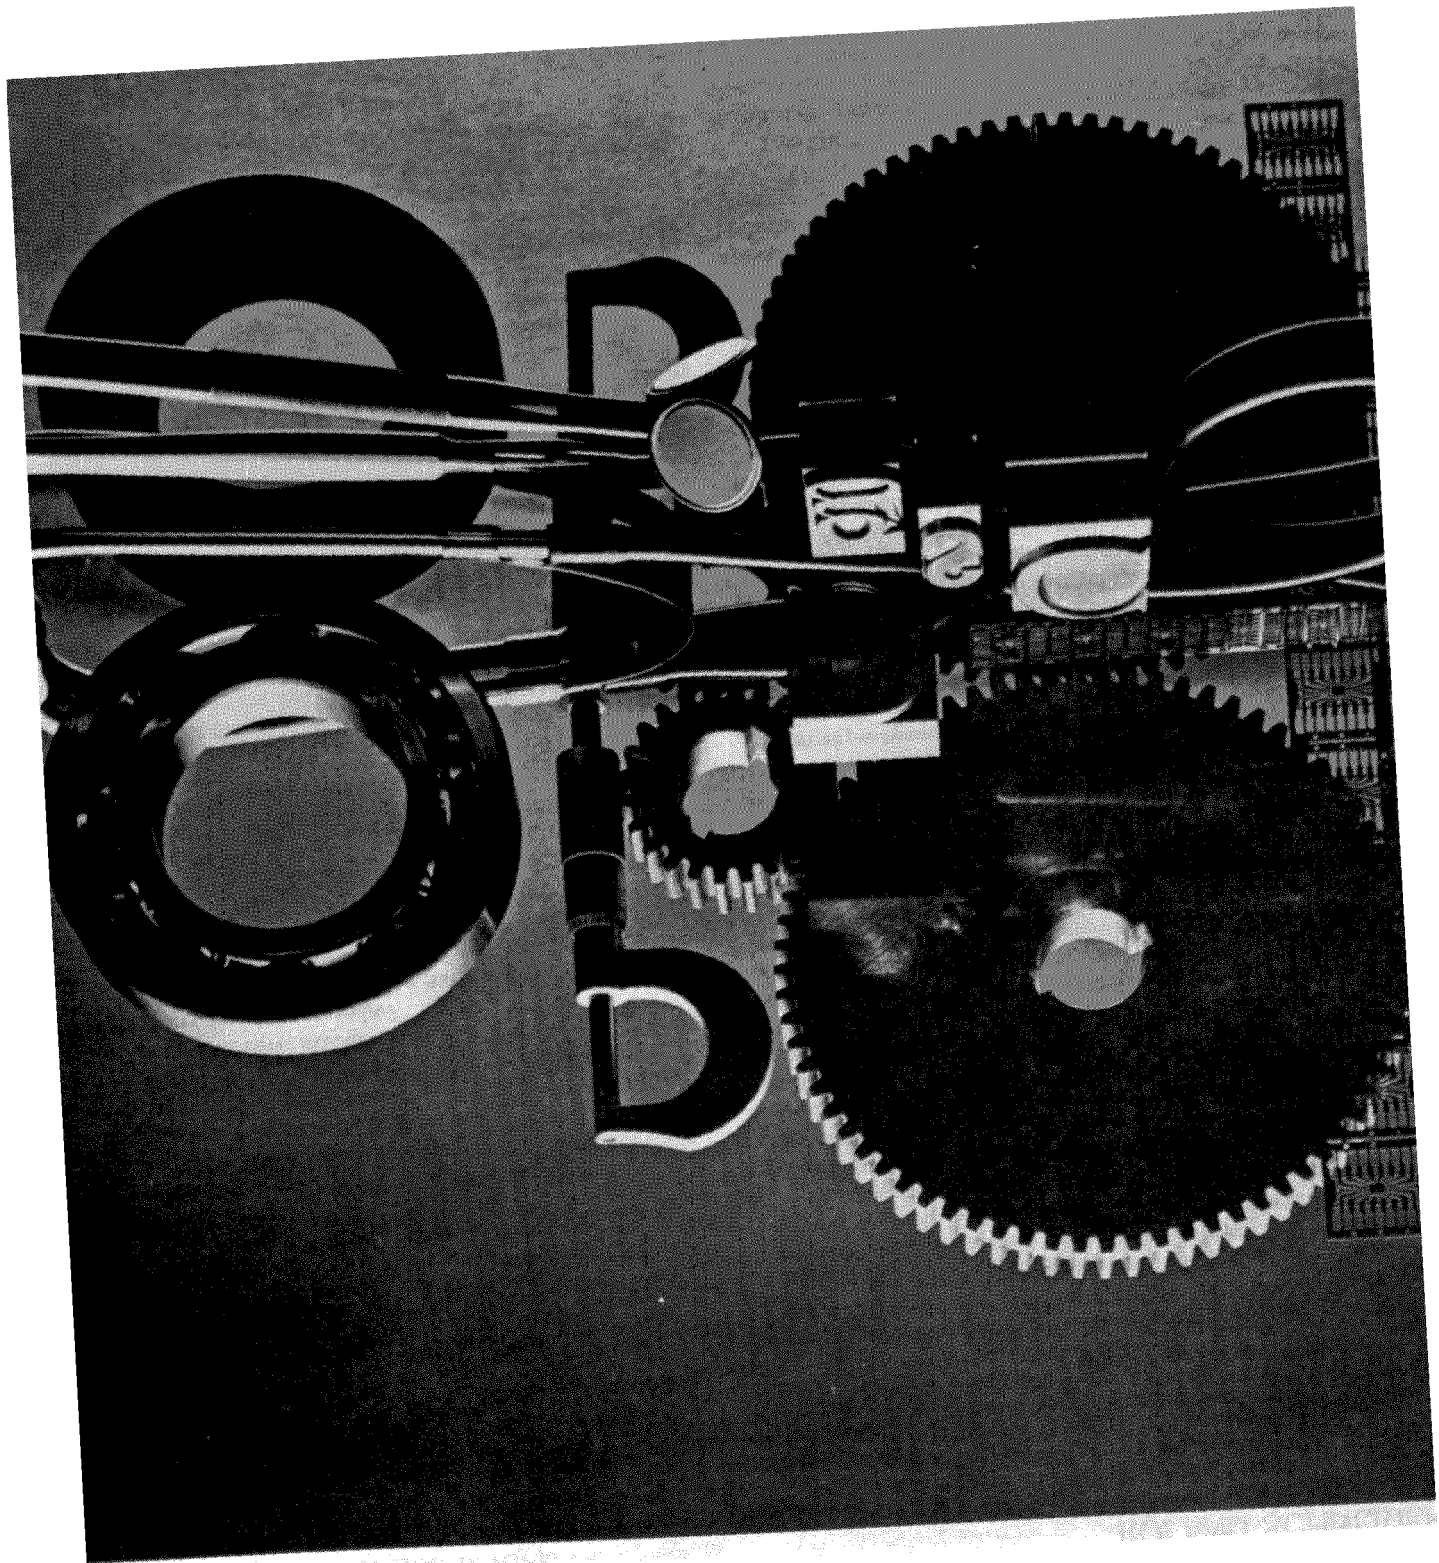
A photograph of a mechanical assembly, showing gears, shafts, and bearings.
